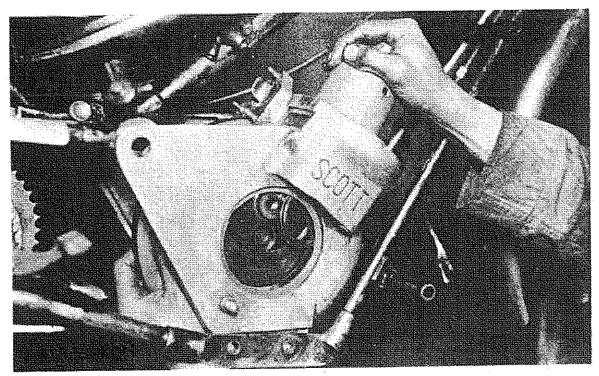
Removing Piston and Rod complete from Crankcase.
